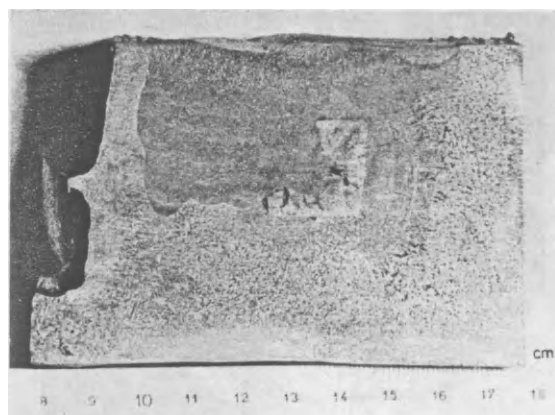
An internal chill was inserted in the lower flange of this casting, in order to economize in feeder metal. Large defective zones were found on ultrasonic and radiographic inspection. An attempt to save the casting by welding failed.
